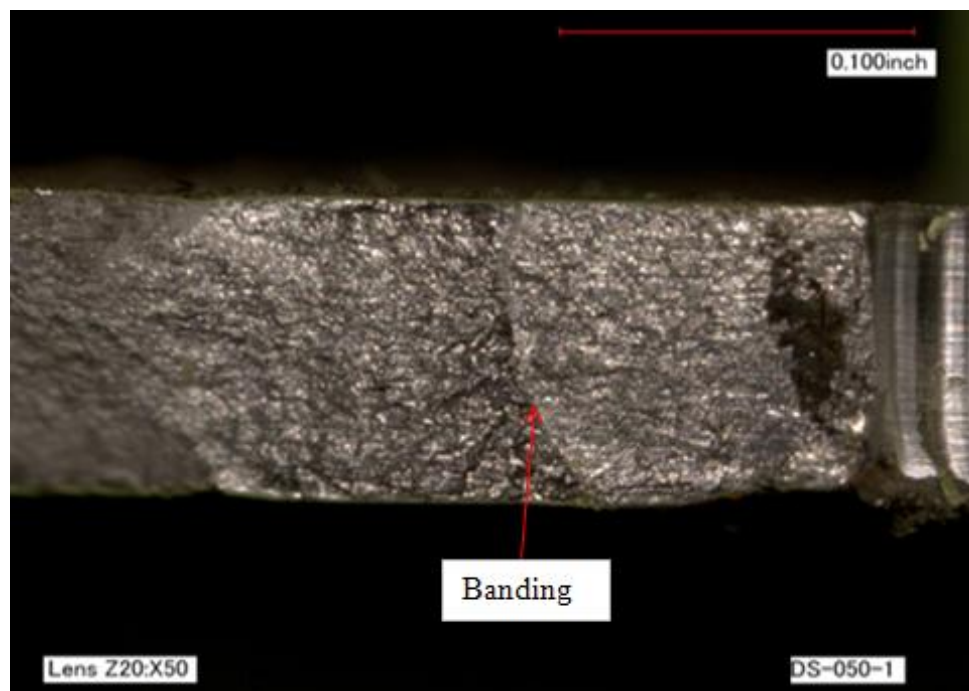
DS-050-1 Fatigue Fracture Surface (X50)
